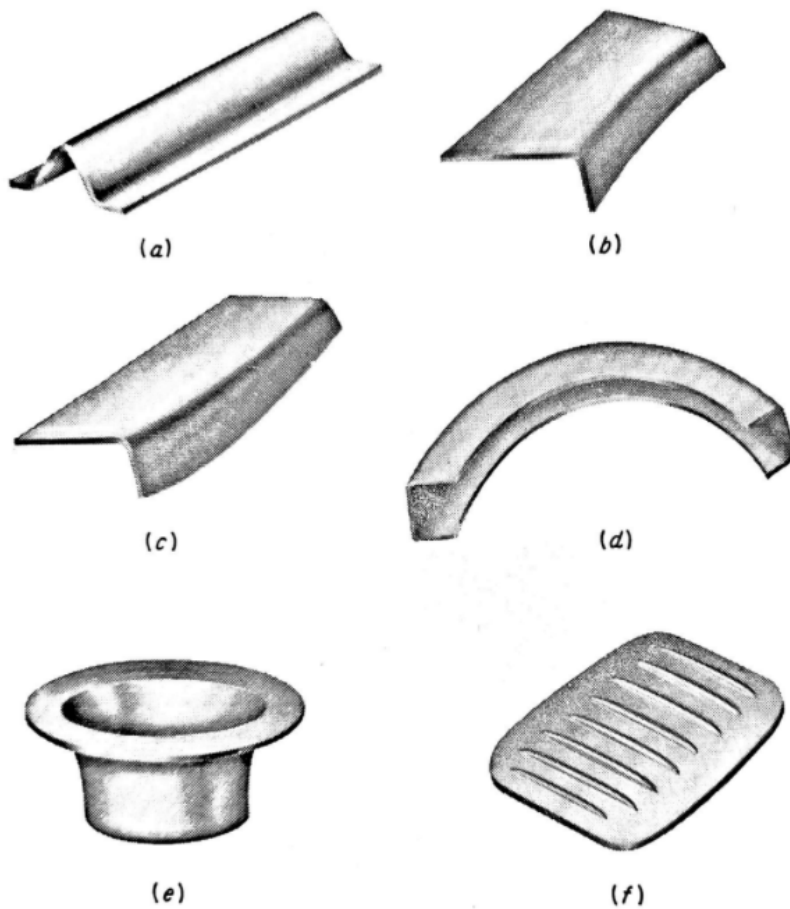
Typical formed shapes in hot stamping. a) Singly curved; b) stretch flange; c) shrink flange; d) curved sections; 3) deep-drawn cup; f) beaded section [1]
